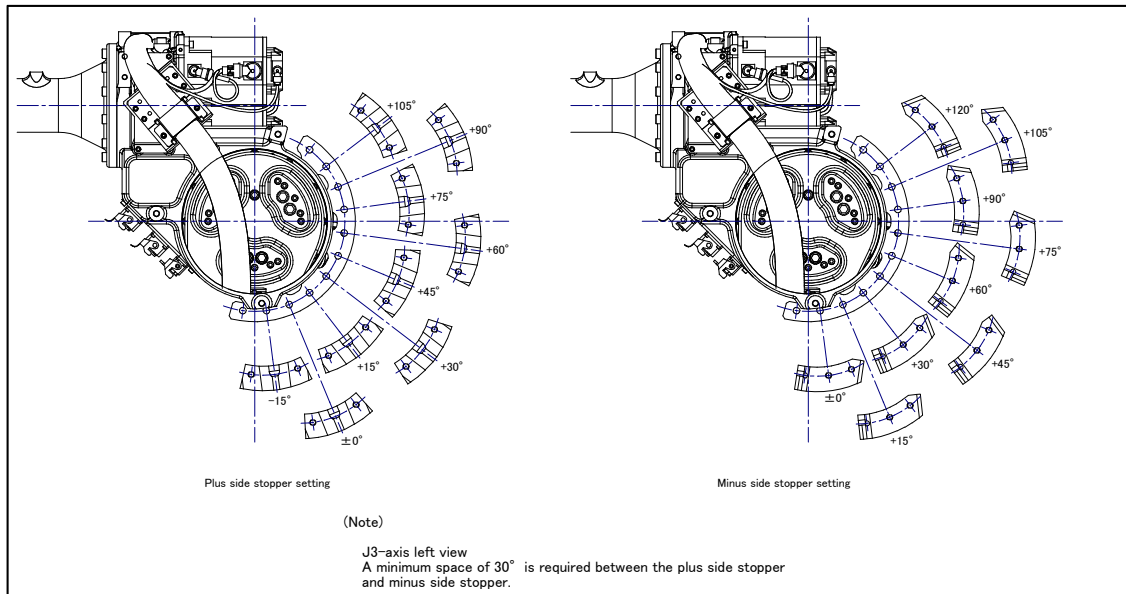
(g) Mounting the J3-axis mechanical adjustable Stopper (Option)
